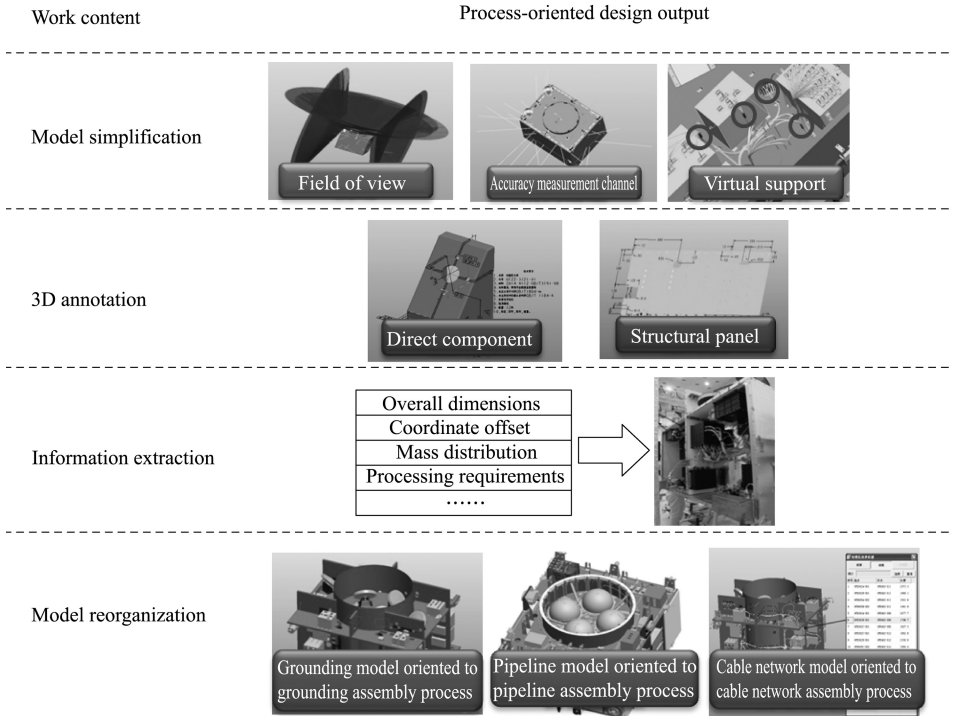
Construction of spacecraft system design model oriented to manufacturing assembly.
